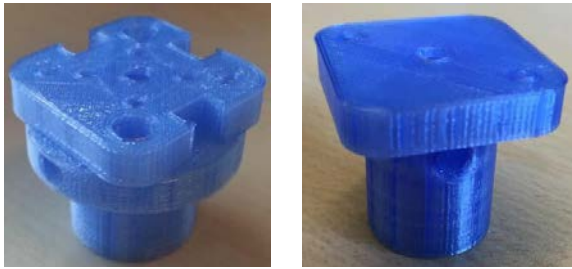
(a) Merged original parts; (b) Adapted & merged parts.
